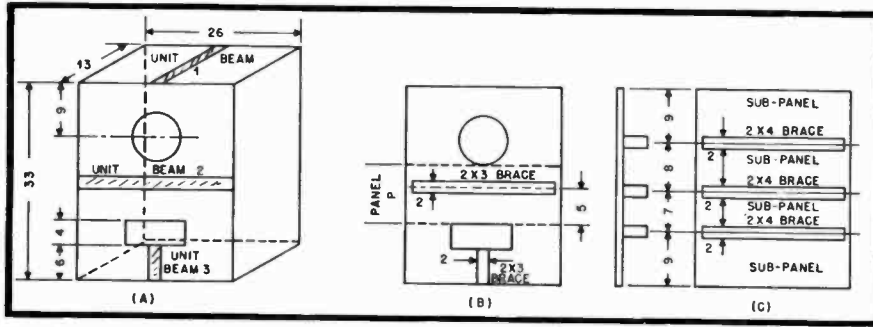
Typical bass-reflex enclosure, with dimensions as used in the sample problem. All stiffening beams are mounted so that their maximum cross-section dimension is perpendicular to the plane of the panel.
